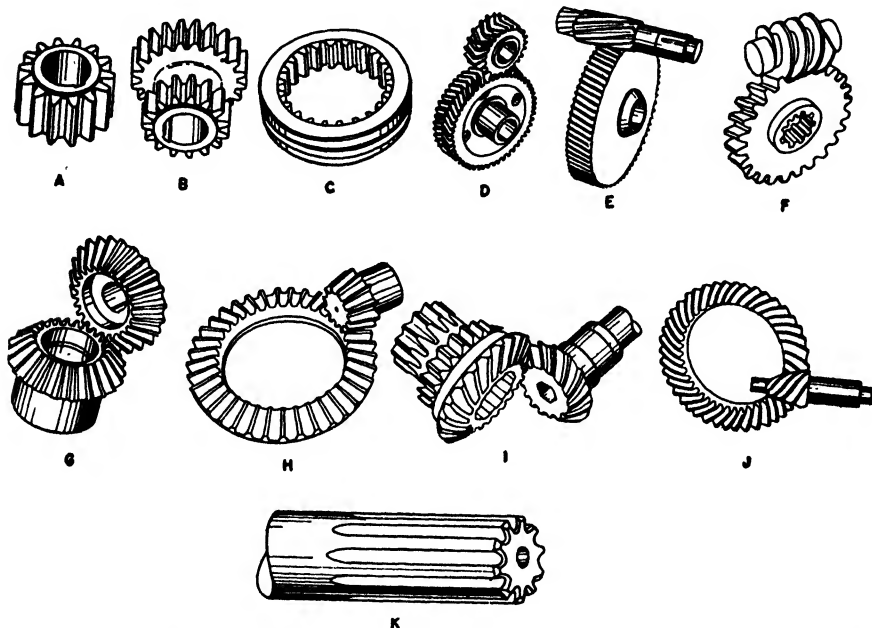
Types of gears: A, spur; B, cluster; C, internal spur; D, herringbone; E, helical; F, worm and worm-wheel; G, straight-bevel; H, straight-bevel gear set; I, spiral-bevel set used in tractors; J, hypoid gear set; K, spline-shaft gear.
